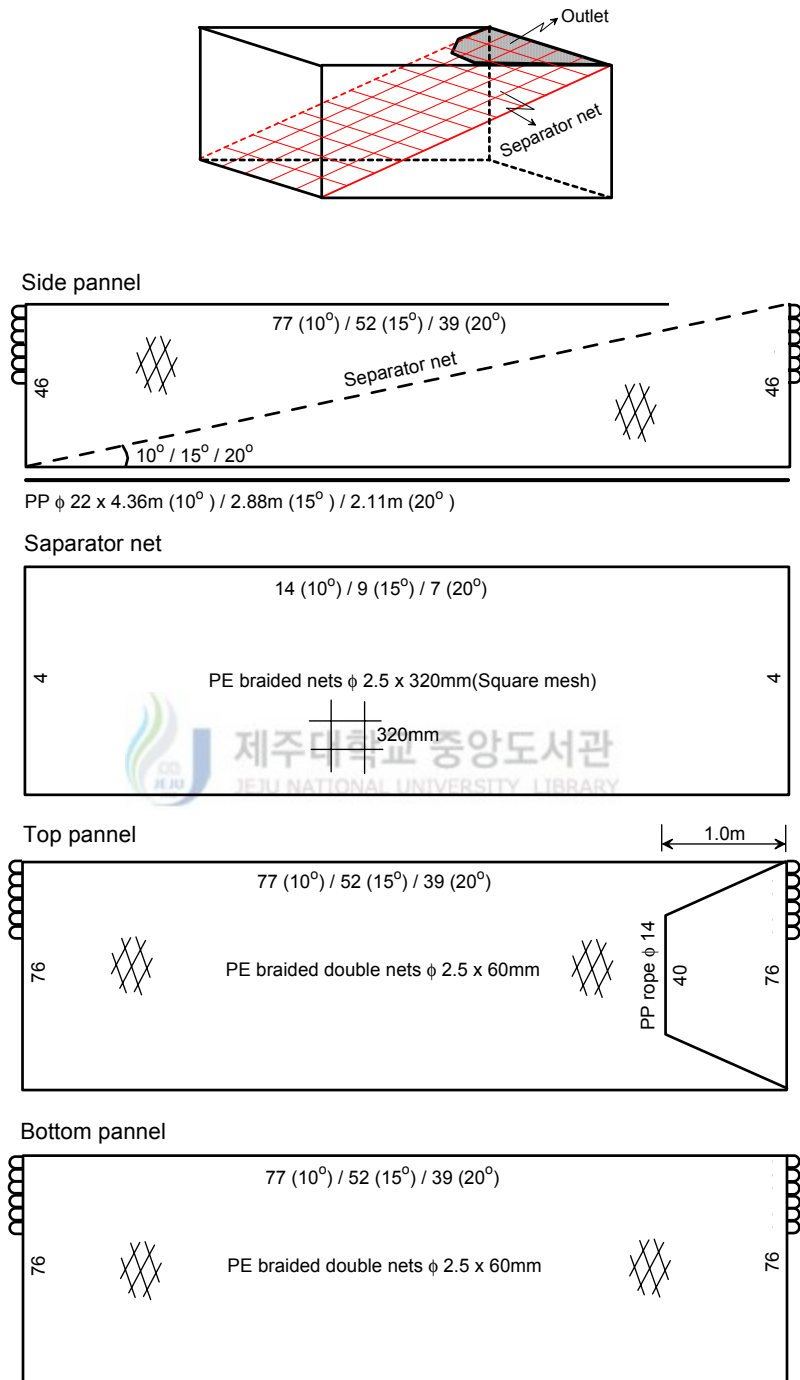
Schematic shape and technical drawing of the S type jellyfish separator system.
